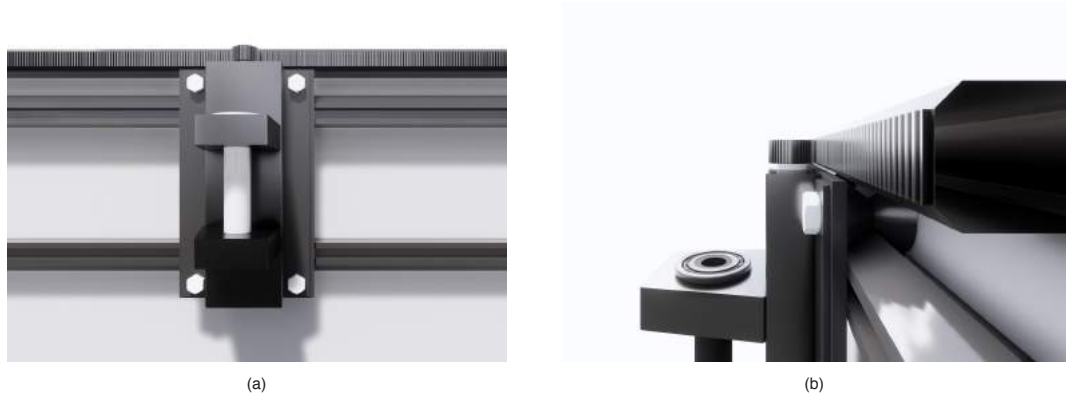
Gliding mounts system. (a) interlocking gliding system steel wheels, (b) gear wheel with gear rail for lineair motion
